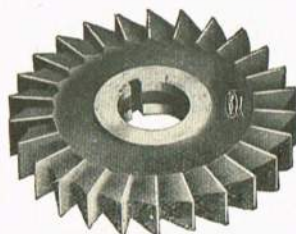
HIGH-SPEED SINGLE-ANGLE CUTTERS.
